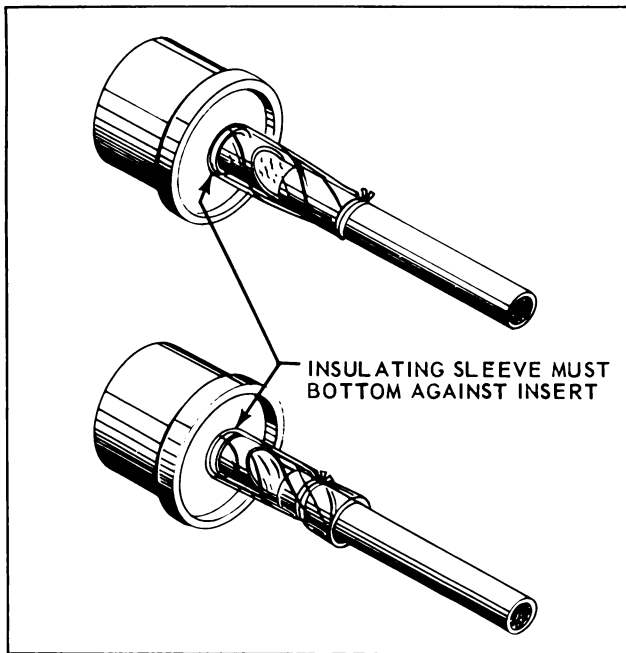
Insulating Sleeve Bottomed Against Insert
